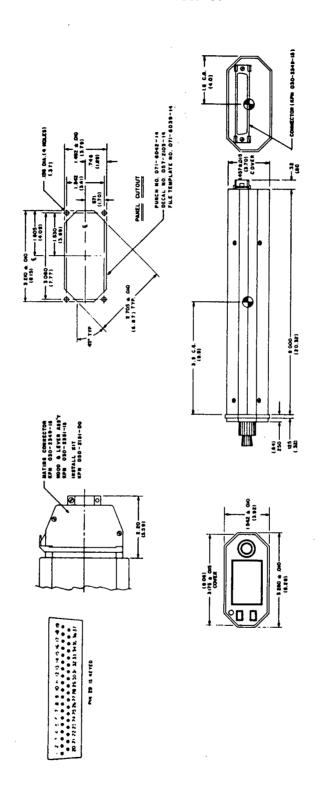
L KAS 2978 INSTALLATION DRAWING
